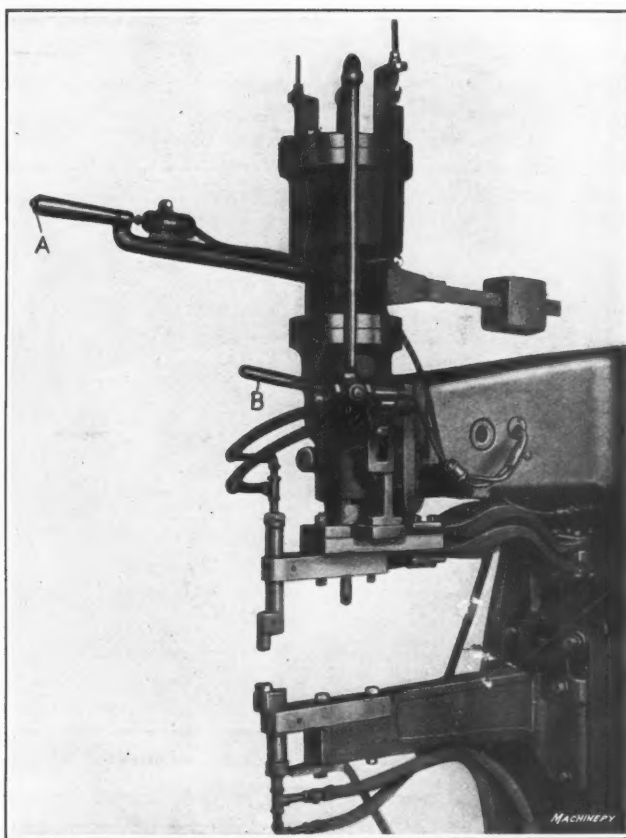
Toledo No. 140 Type Electric Welding Machine fitted with Air Cylinder for Electric Riveting
